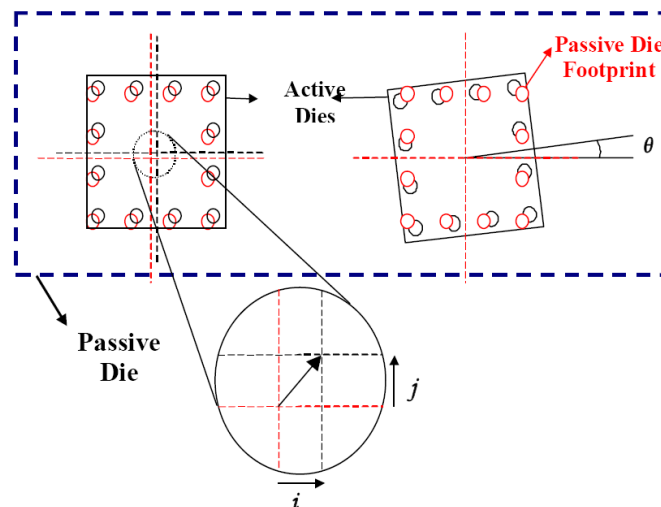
possible misplacement during assembly process: shift (left), and rotation (right).
